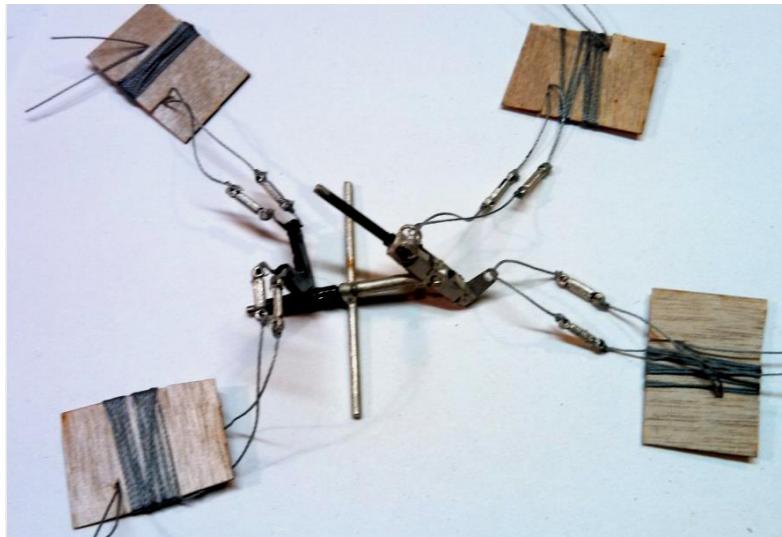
Aileron/Elevator Control Sub-Assembly
